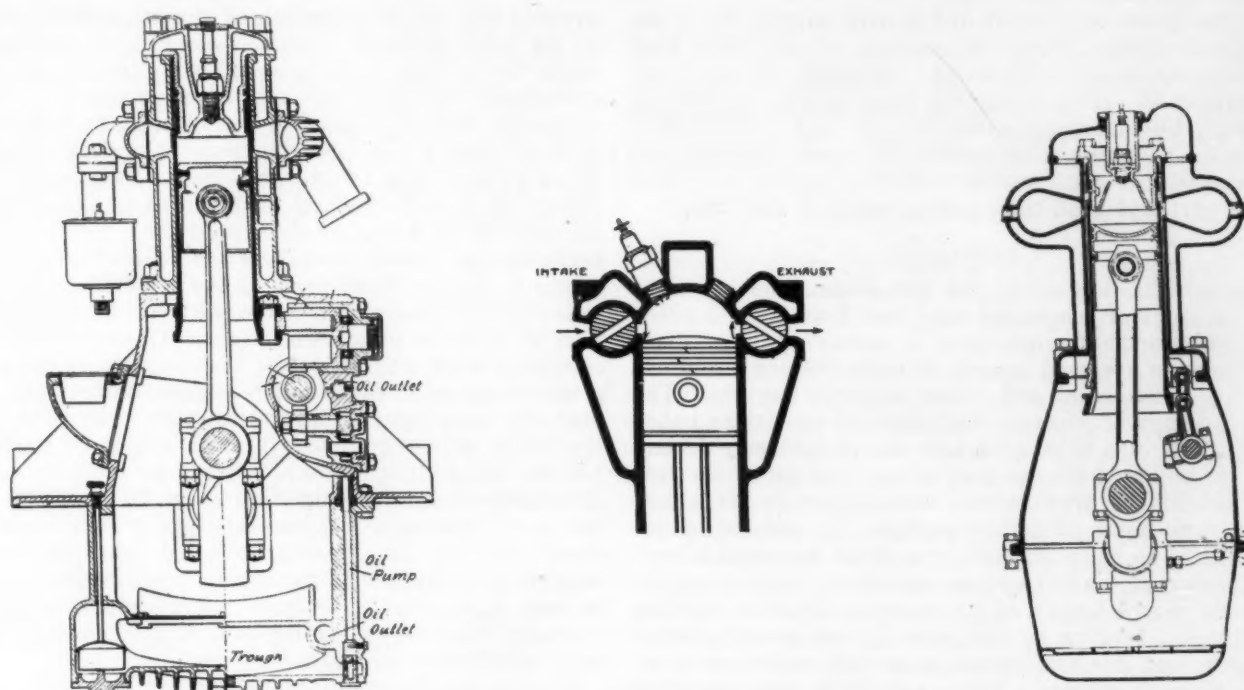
SINGLE-SLEEVE, ROTATING AND DOUBLE-SLEEVE VALVE TYPES OF ENGINE
